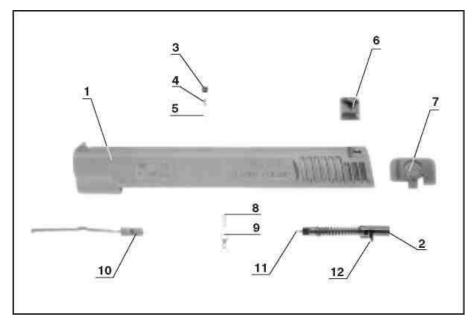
Fully disassembled slide: 1 – slide; 2 – firing pin assembly; 3 – plug; 4 – round inside chamber indicator spring; 5 – round inside chamber indicator; 6 – sighting notch; 7 – retaining plate; 8 – firing pin blockade spring; 9 – firing pin blockade; 10 – extractor; 11 – firing pin tip and 12 – firing pin projection (firing pin's integral parts)
